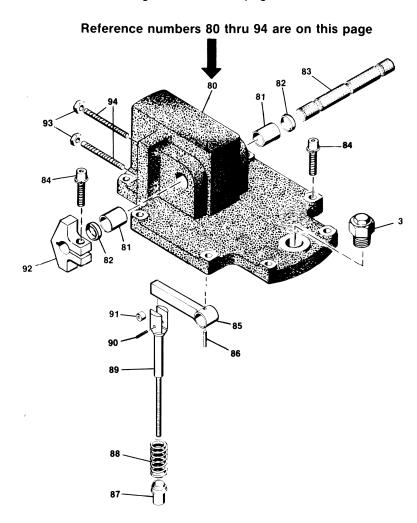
Parts for the TG-13 and -17 Cover Assembly (Lever Speed Setting) for Use with Cast-Iron Case TG-13 and -17
